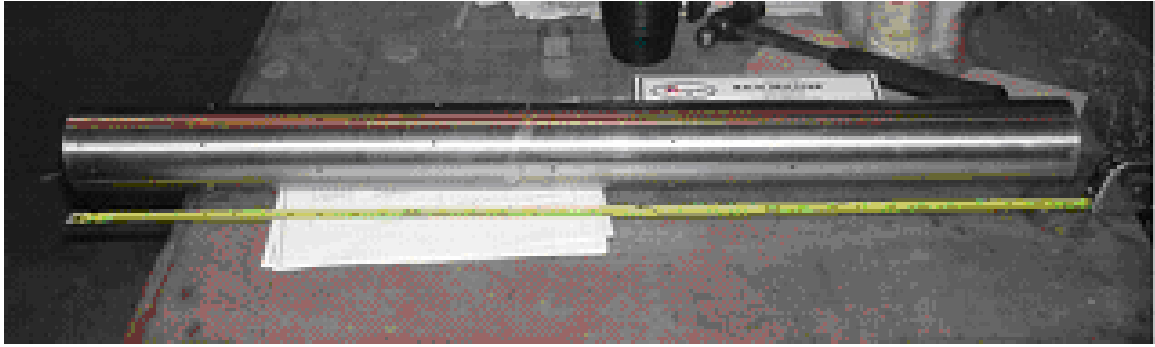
Air-bleed stainless steel liner with 54 1/8-in diameter holes prior to attachment of transition pieces
